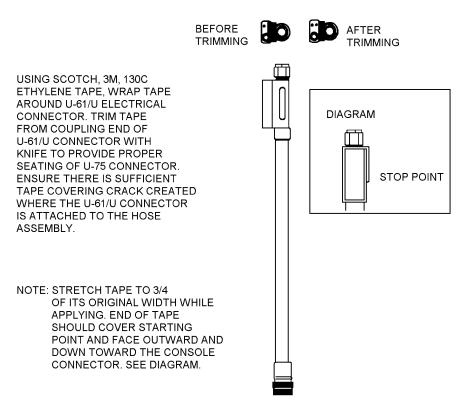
Regulator to Survival Kit Hose Assembly Taping
